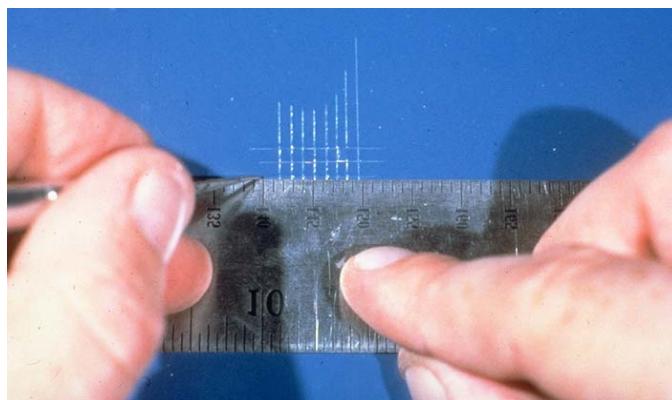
Making Cuts with X-Acto Knife for Cross-Hatch Tape Test
